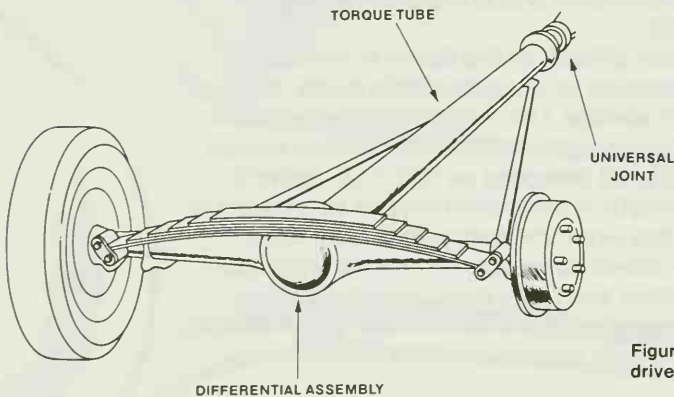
The drive shaft is enclosed in a torque-tube-style drive assembly. (Ford Motor Company)
